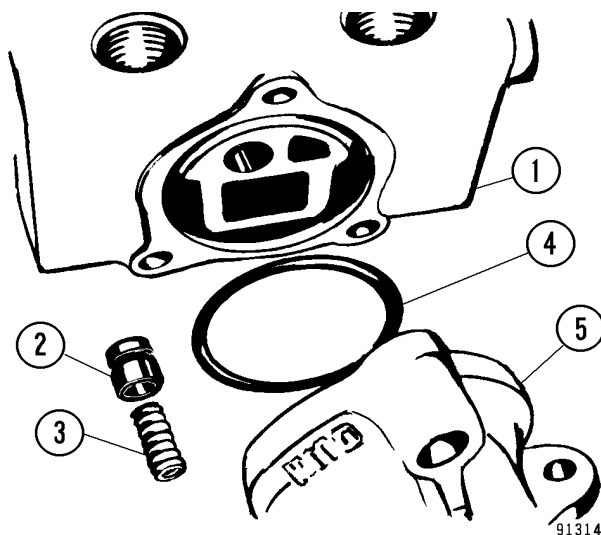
HOIST PILOT VALVE REASSEMBLY
